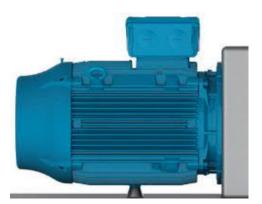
Mounting method of flange mounted motors with frame base support
